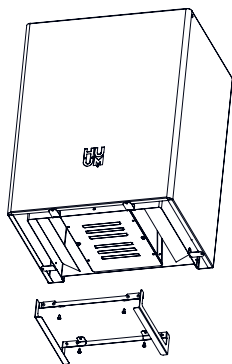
Installation of the heat diverter for HUUM CORE Wall and CORE Wall Mini
